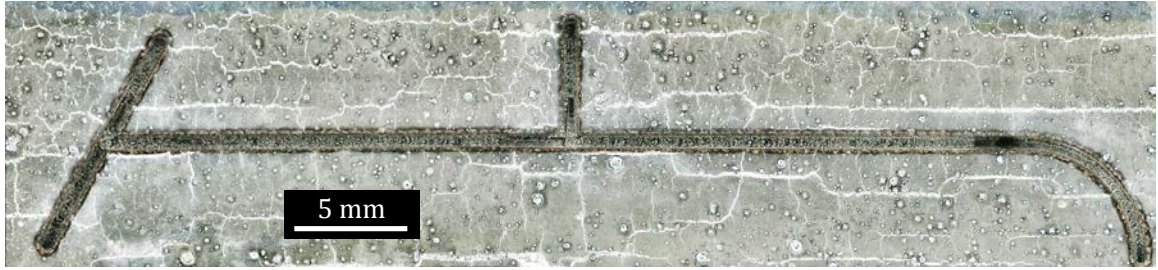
A complex-shaped slot machined in SiC-SiC CMC using ODEM roughing and EDM shaping finishing using a $\varnothing 0.5$ mm brass tube. Cracks on the surface were present before machining and are not caused by erosion process.
